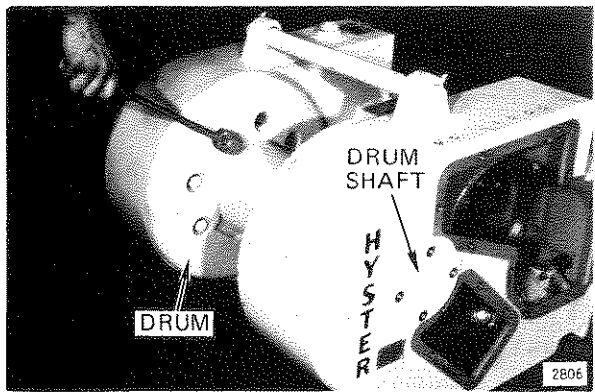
REMOVAL AND DISASSEMBLY OF OIL BRAKE ASSEMBLY (Sheet 2 of 2)
